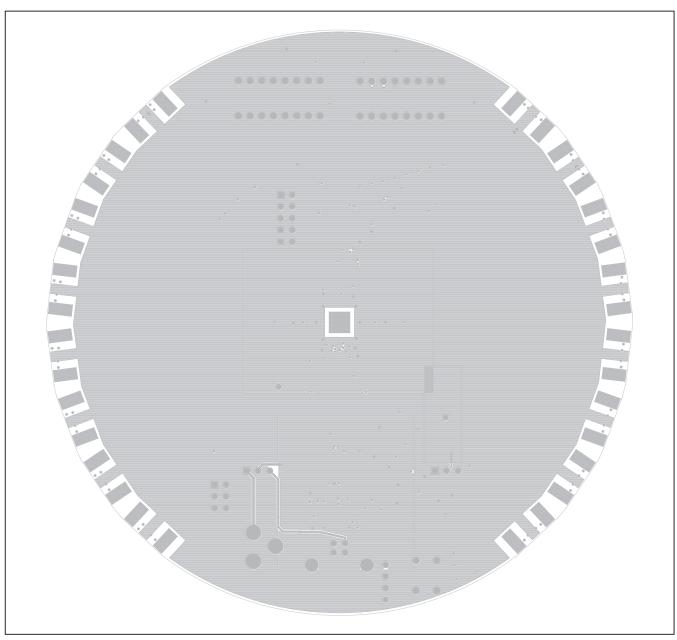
MAX3987 EV Kit PCB Layout—Power Plane (Sheet 3 of 4)
